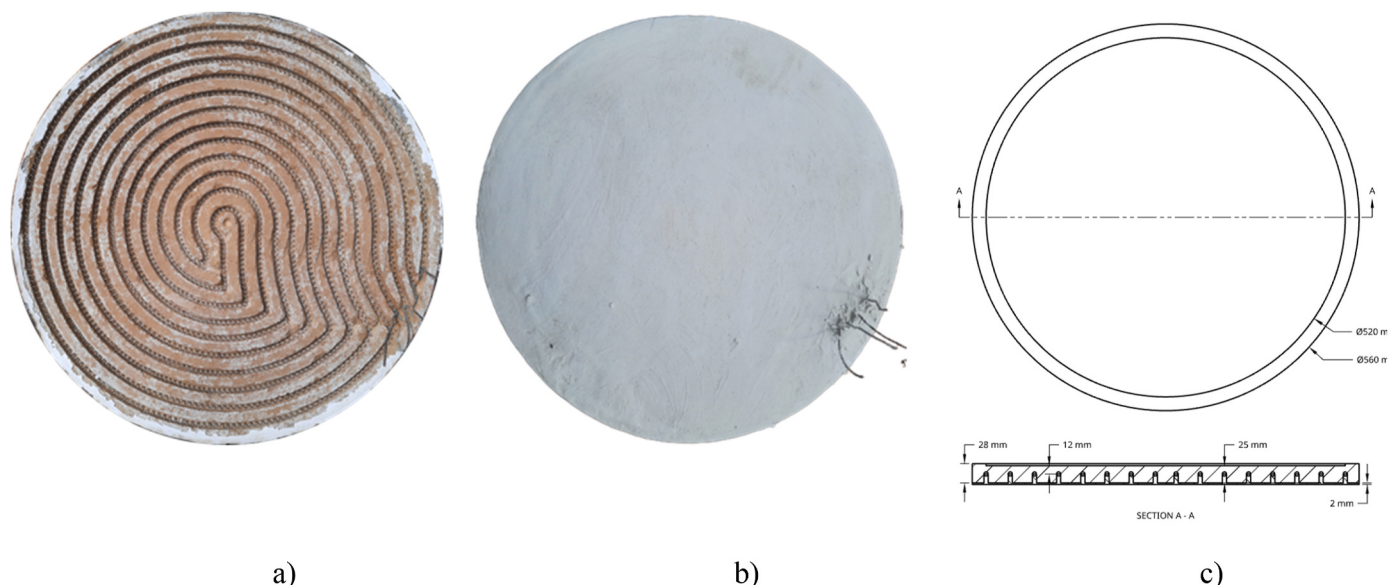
Heating element embedding process: a) Back side of clay plate with groove and resistor embedded; b) Sealed with gypsum; c) Plate dimension.
